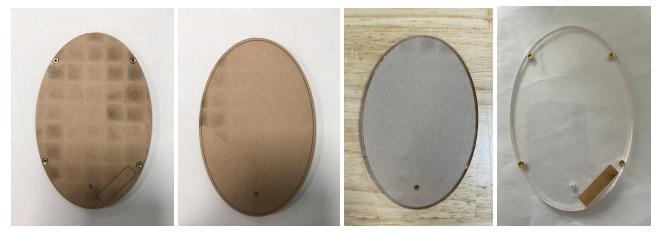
From left to right: Acrylic window Side 1, Side 2, outer paper ring removed, and protection paper removed
